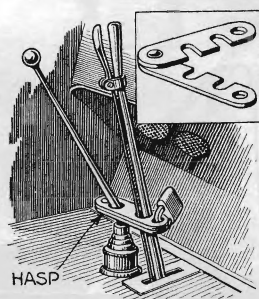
Lock for gear shift and emergency brake. It is made of two pieces of flat steel
